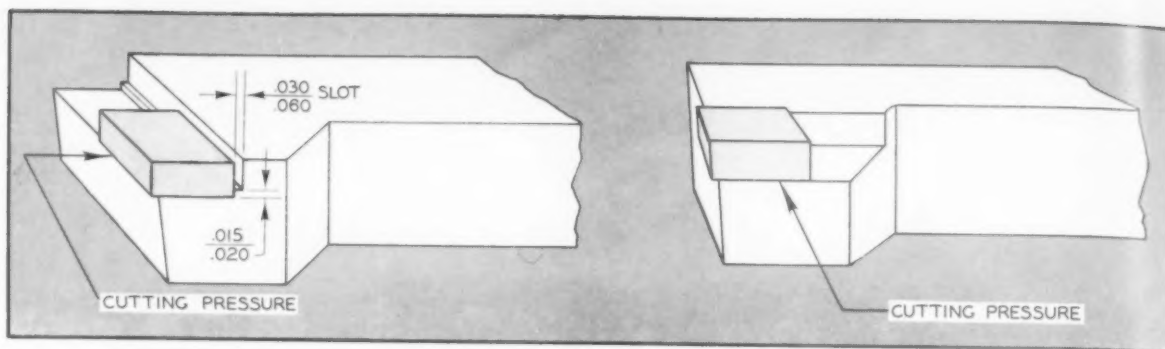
Slash-mill design for facing-type tools (left) and for turning tools (right). The figure at the left illustrates a means of relieving strain from the back of the carbide.
